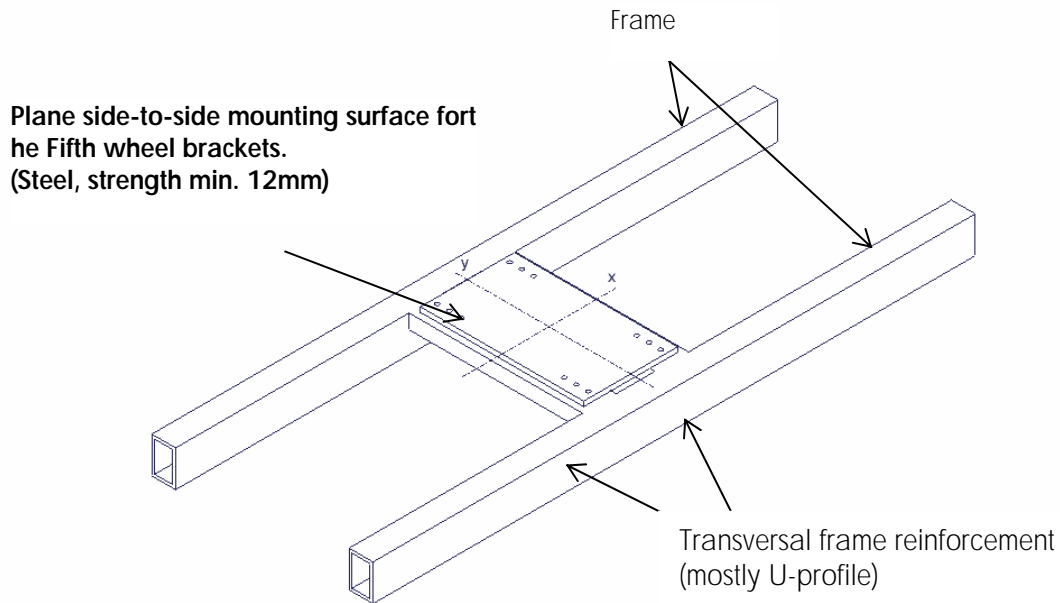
Example for a frame with a plane side-to-side mounting surface for the SK-L 26.3
